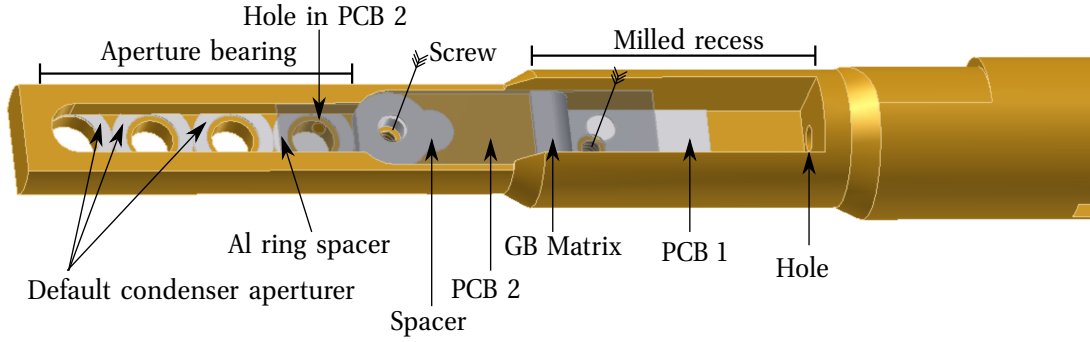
CAD drawing of tip of custom condenser aperture holder. The holder accepts up to three default annular apertures and an aluminum ring spacer keeping the apertures in place. Above this spacer the twin aperture fixed to the PCB is located. By means of an interconnector sheet (GB Matrix) a connection between the PCBs is ensured.
